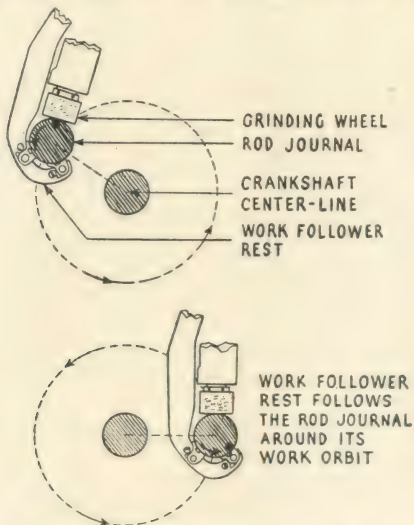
SHOWING PRINCIPLE OF THE SUNNEN GRINDER
